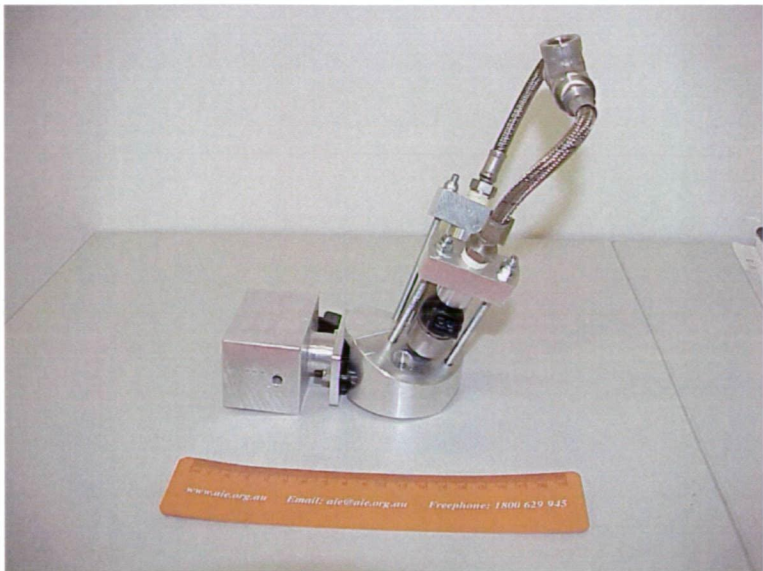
Completed inlet manifold, air throttle, injectors and fuel rail assembly
